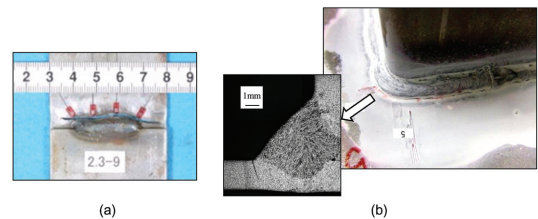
Fatigue crack initiation of weld part (a) Arc welded lap joint with weld start and end point, (b) T shape type arc welded joint
